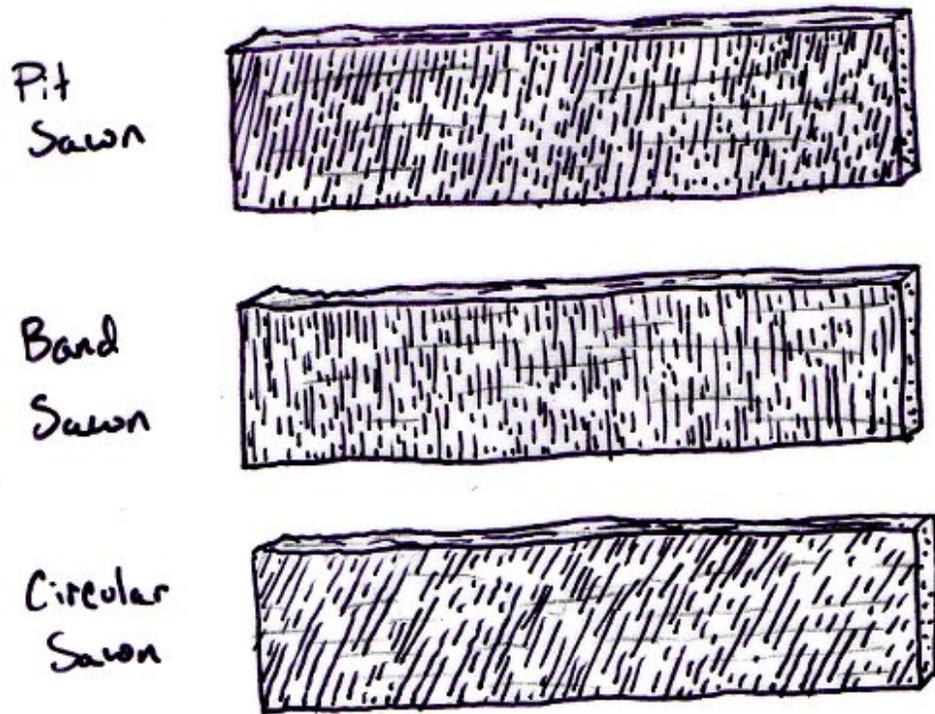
Drawing of various saw marks on wood. Drawing by author.
